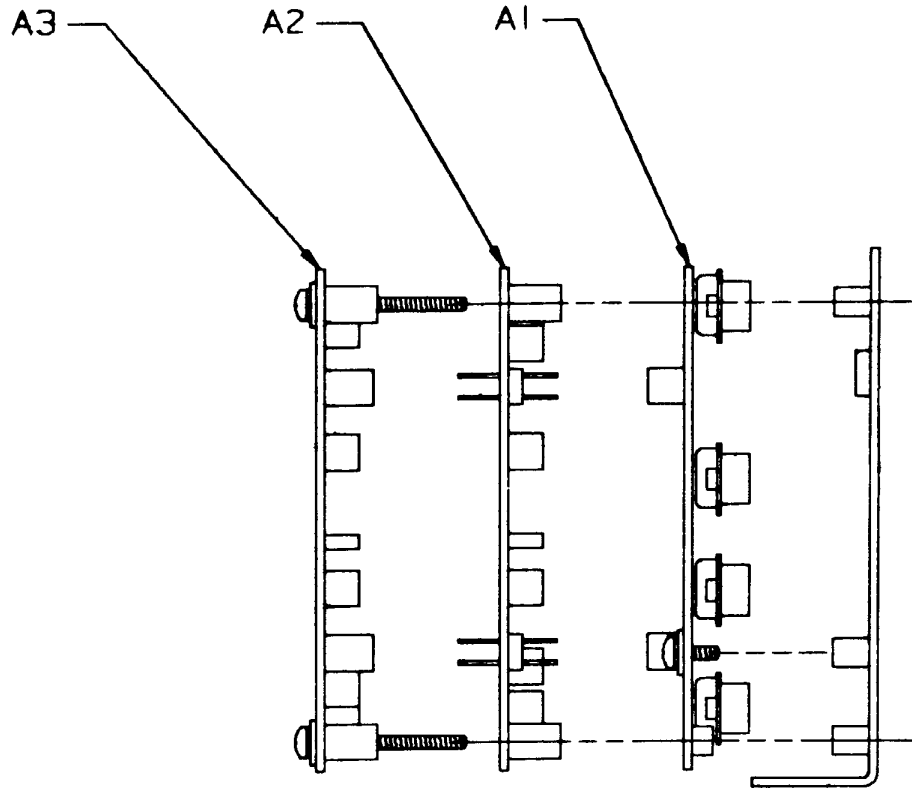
Filter Board Assembly A20 Subassembly Location Diagram (10121-1250 Rev. C)
